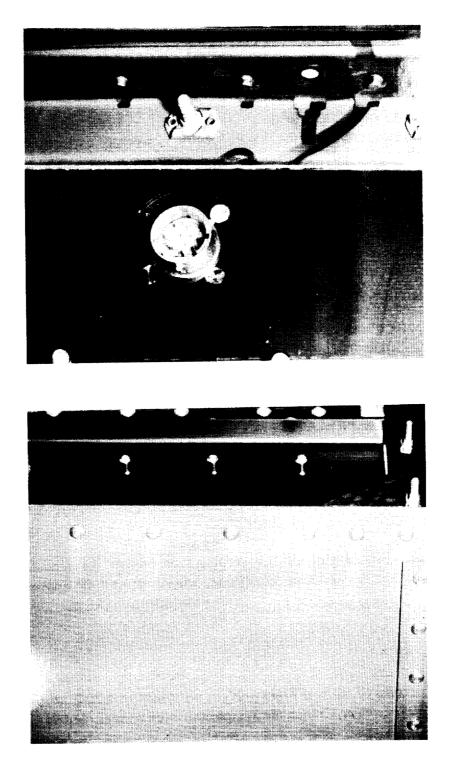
Bolts, wire and rivet shadows on the back of the tray
